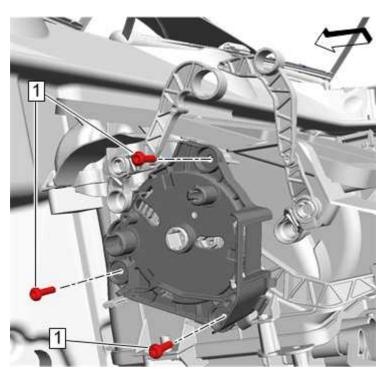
Mode Control Cam Actuator Mounting Plate Bolt Courtesy of GENERAL MOTORS COMPANY
